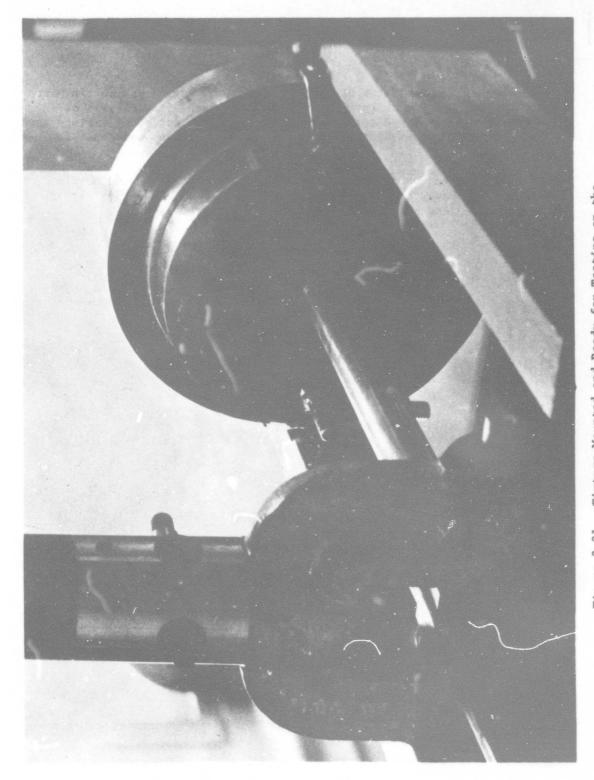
Fixture Mounted and Ready for Testing on the Instron
